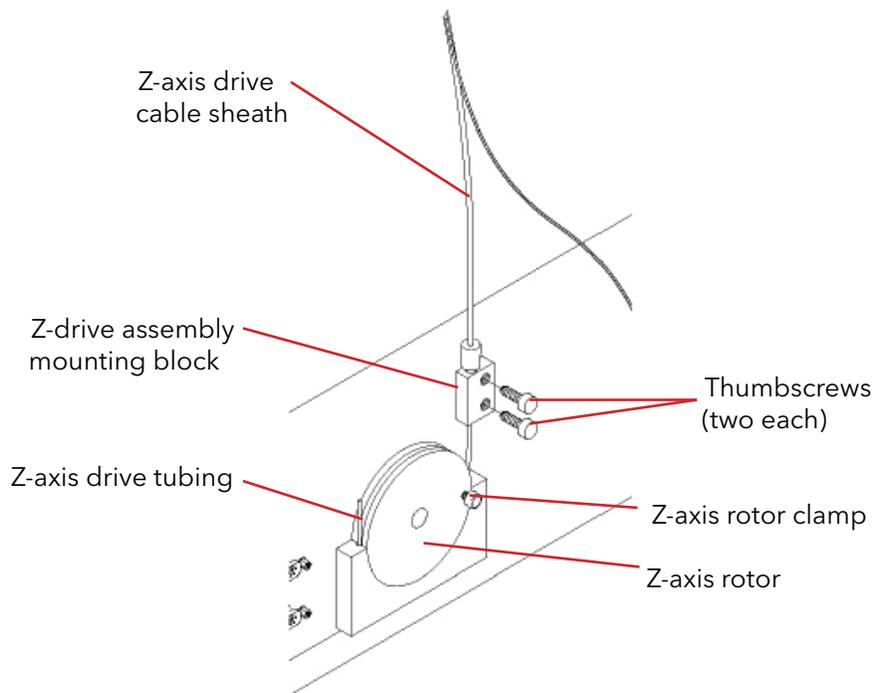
Autosampler Back View Showing the Z-Axis Rotor and Mounting Blocks
